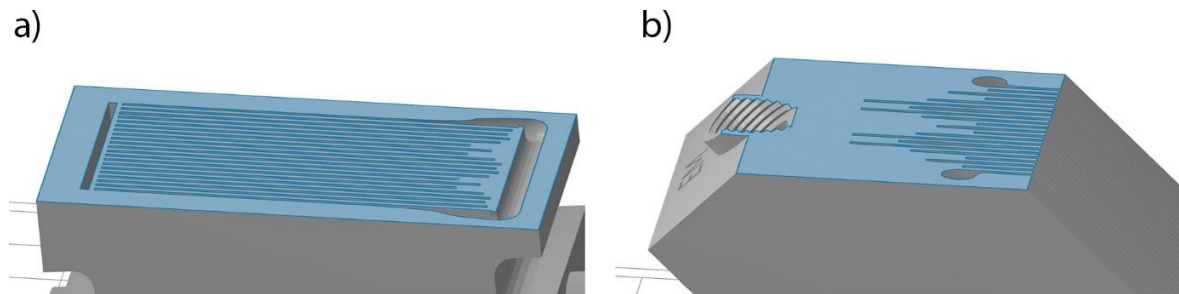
a) Deposition head printed as it exits the 3D printer containing the supports needed to fabricate the piece. b) Texture on the surface of a 3D printed piece created by the supports. This texture is created as the supports are physically removed from the piece, and it can be removed by polishing of the surface.
